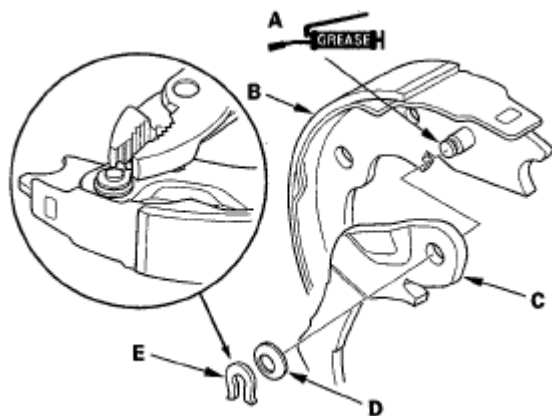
Identifying Grease Area Of Sliding Surface And Pivot Pin
